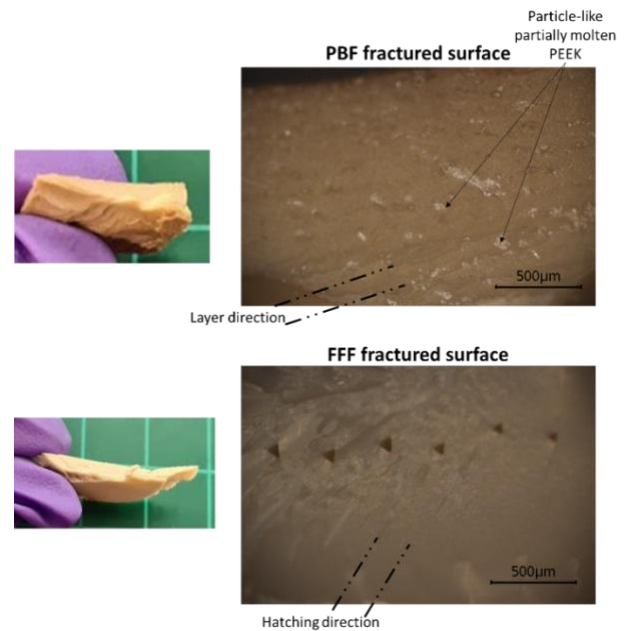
Fractured PBF and FFF cranial specimens after the drop tower impact tests.
